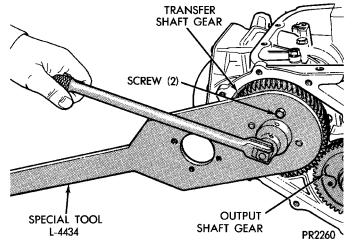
Remove Transfer Shaft Gear Retaining Nut
